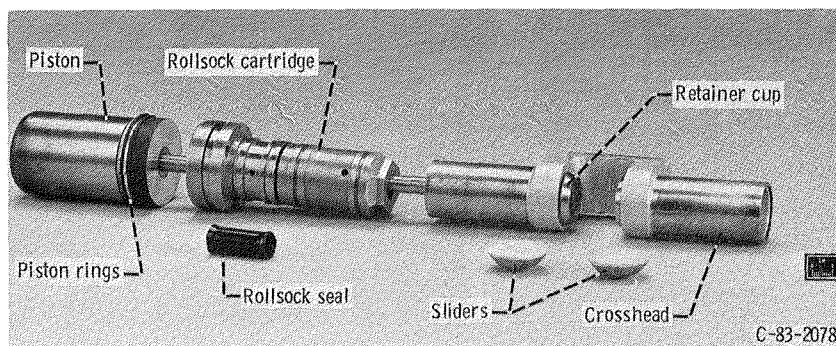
Piston, rollsock cartridge and seal, and crosshead with sliders.
